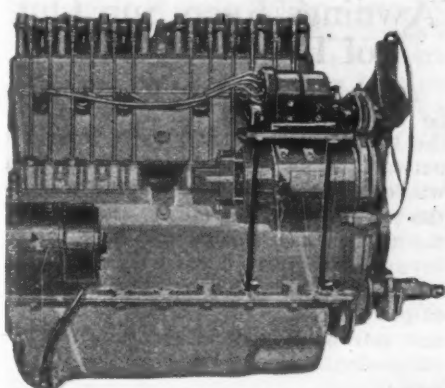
Suggested method of mounting a magneto on 1916 Oakland
